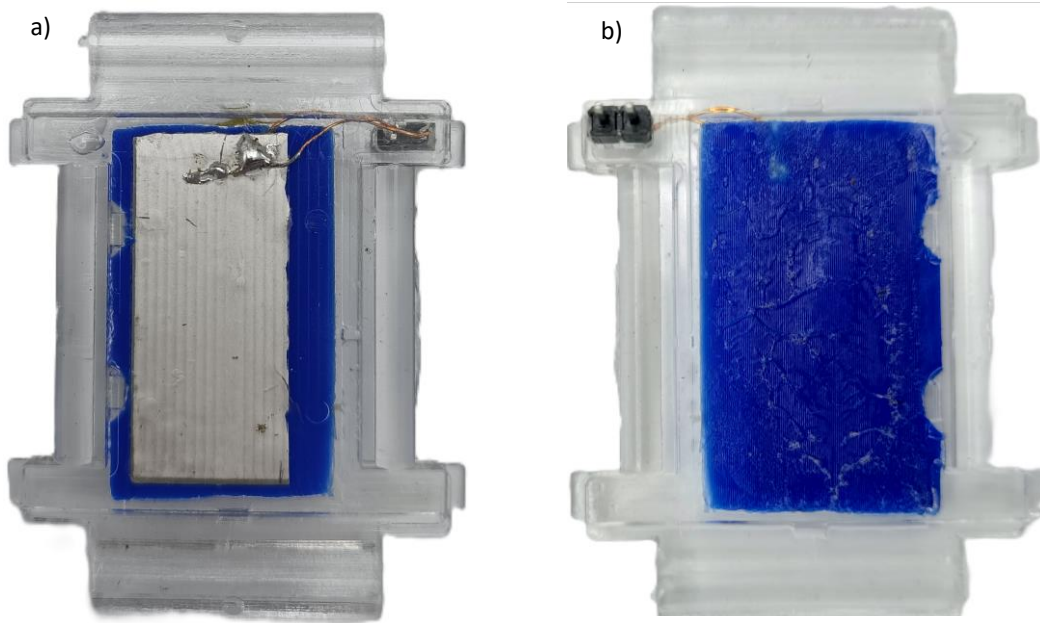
a) Hosting part front view injected using PMMA, b) Hosting part back view injected using PMMA
